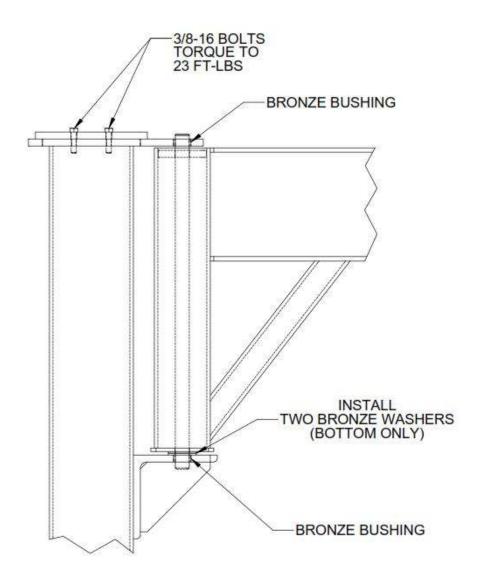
32: Jib Crane: Thrust Washers Location
